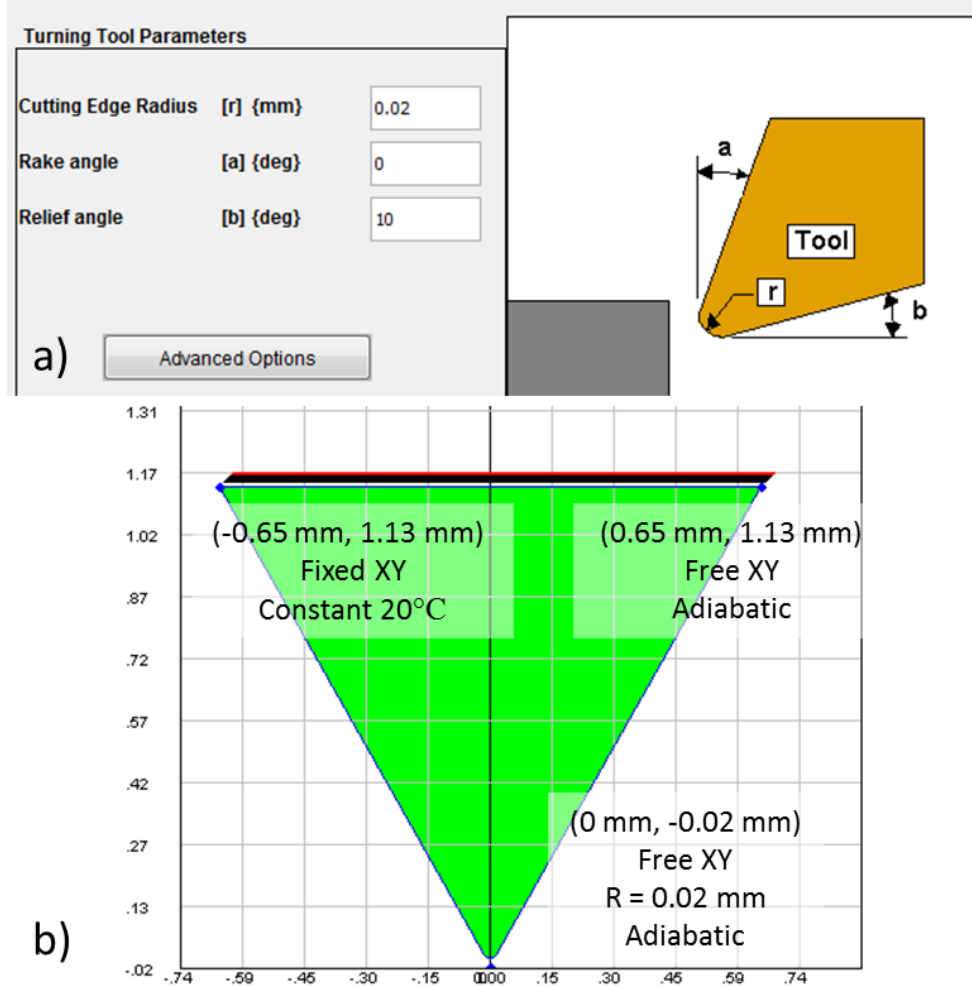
Tool Geometrical Parameters for a) Zero Rake, b) Negative Rake
